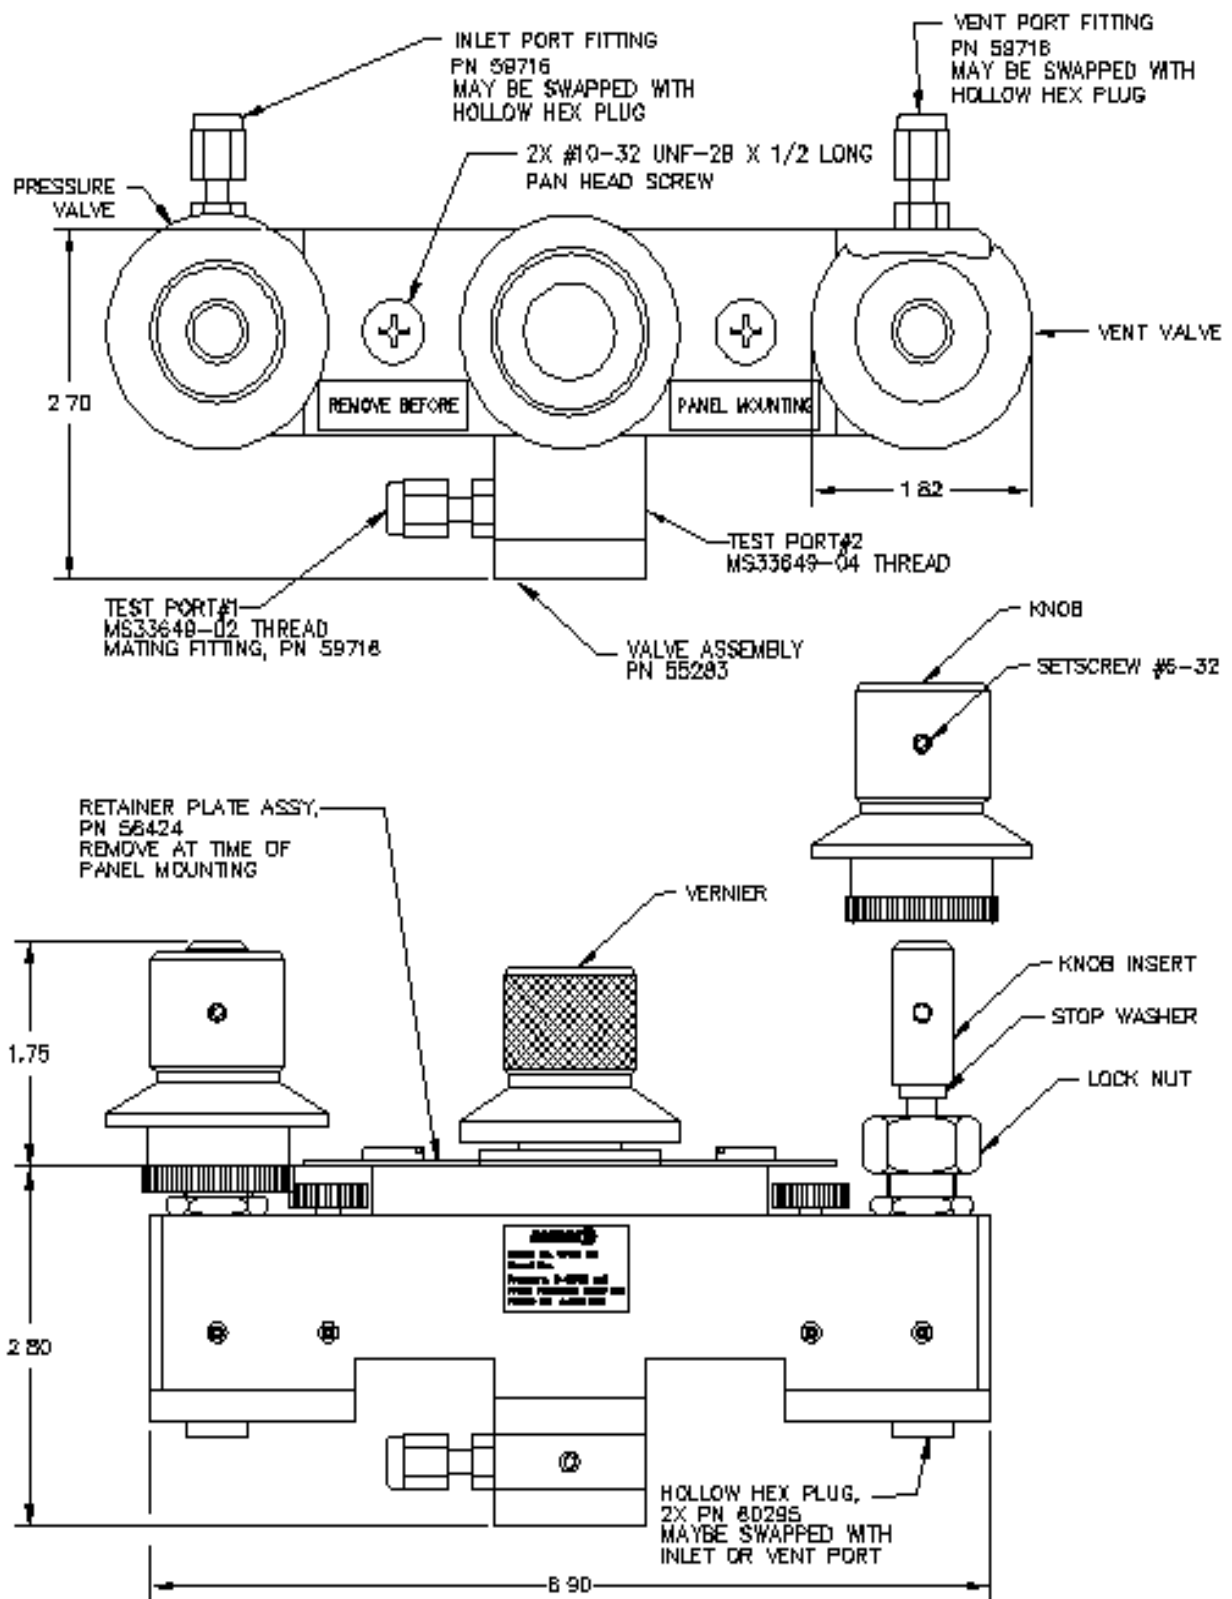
ORION-2C Valve Assembly (PN 55283) Mounting View
